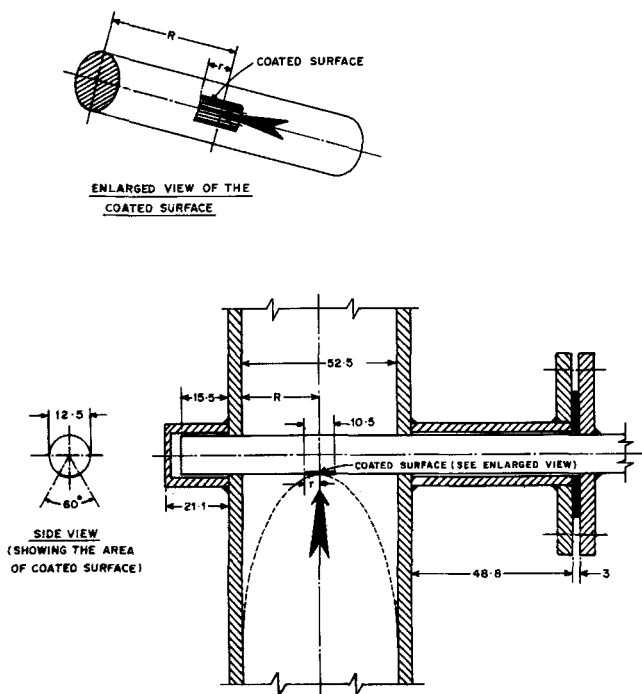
Test section (enlarged view) (all dimensions are in millimeters).
